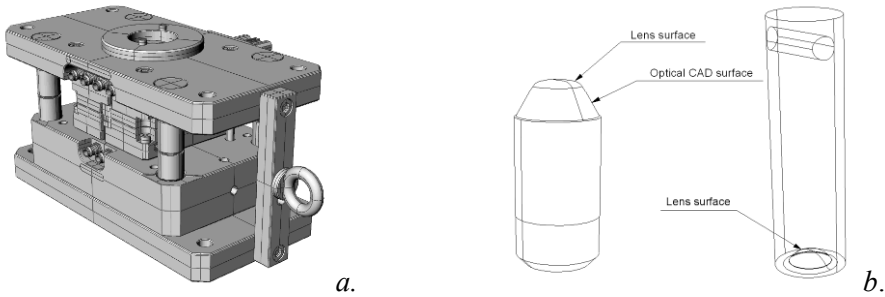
A 3D model of the injection mold. b. designs of the optical diamond-turned mold insert pins for the microscope lens tooling.
